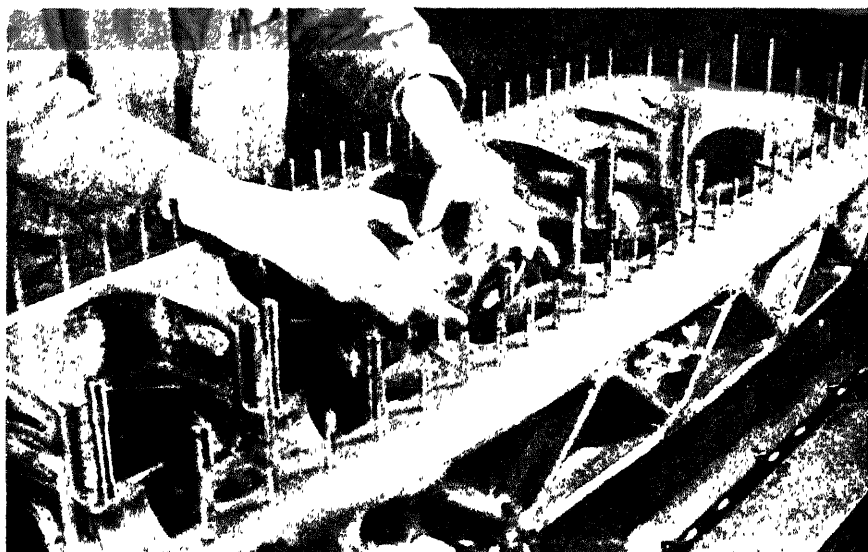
FITTING THE HALF MAIN BEARINGS IN CRANKCASE
